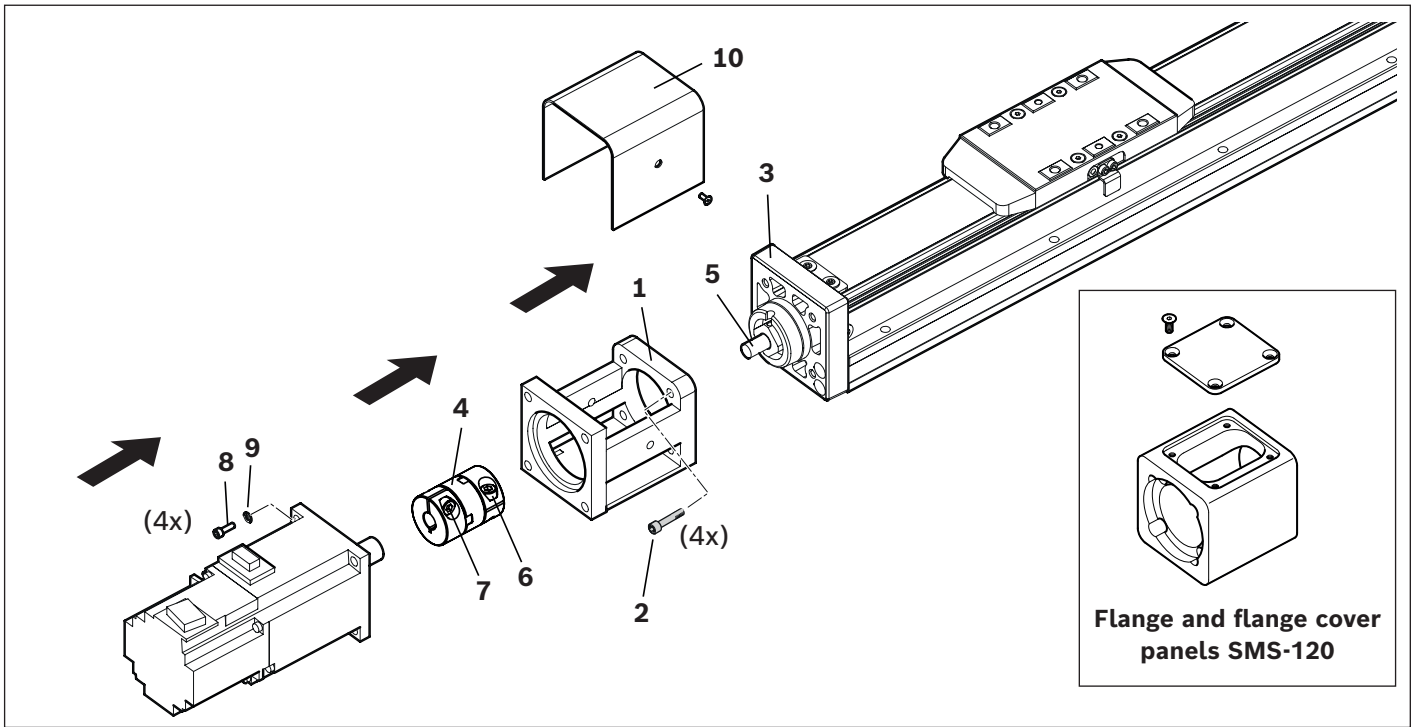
Mounting the motor with flange and coupling (SMS-040 – SMS-120)
